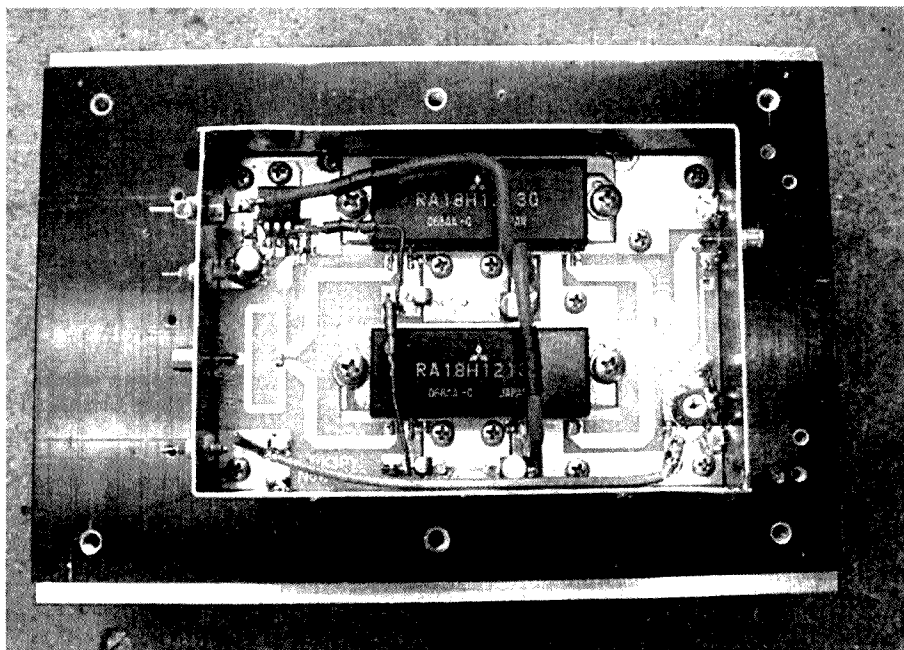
The completed amplifier mounted on its heat sink ready for testing.
